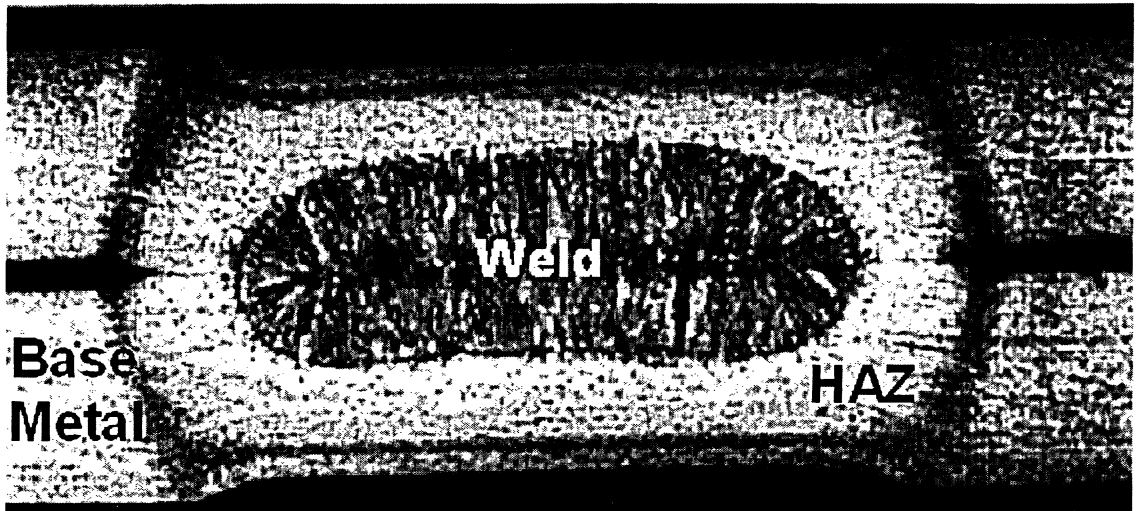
Cross section of the weld nugget formed by spot welding¹⁷.
